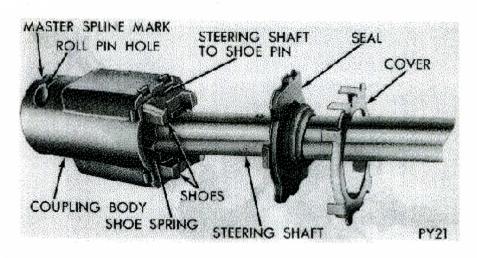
STEERING COUPLING PARTIALLY ASSEMBLED
